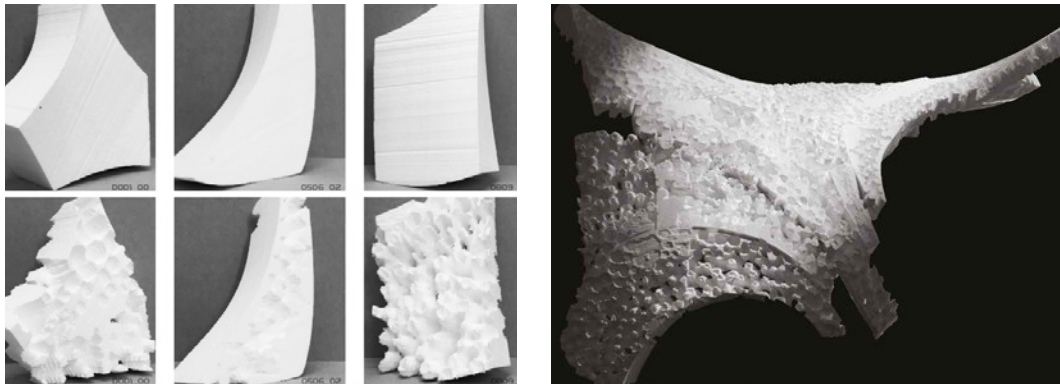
Multi-mode Hybridity - The manufacturing method is developed based on how components work in compression and tension; Left: Robotic Hot Wire Cutting followed by Robotic Milling on both sides; Right: Assembled prototyped.
